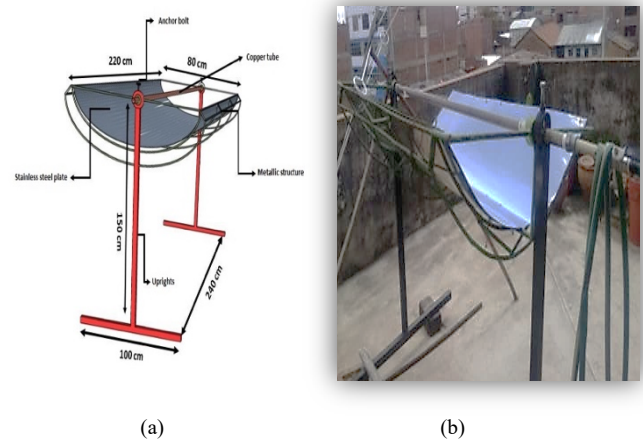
Model CPC side view (a), prototype CPC to scale and actual size (b).
